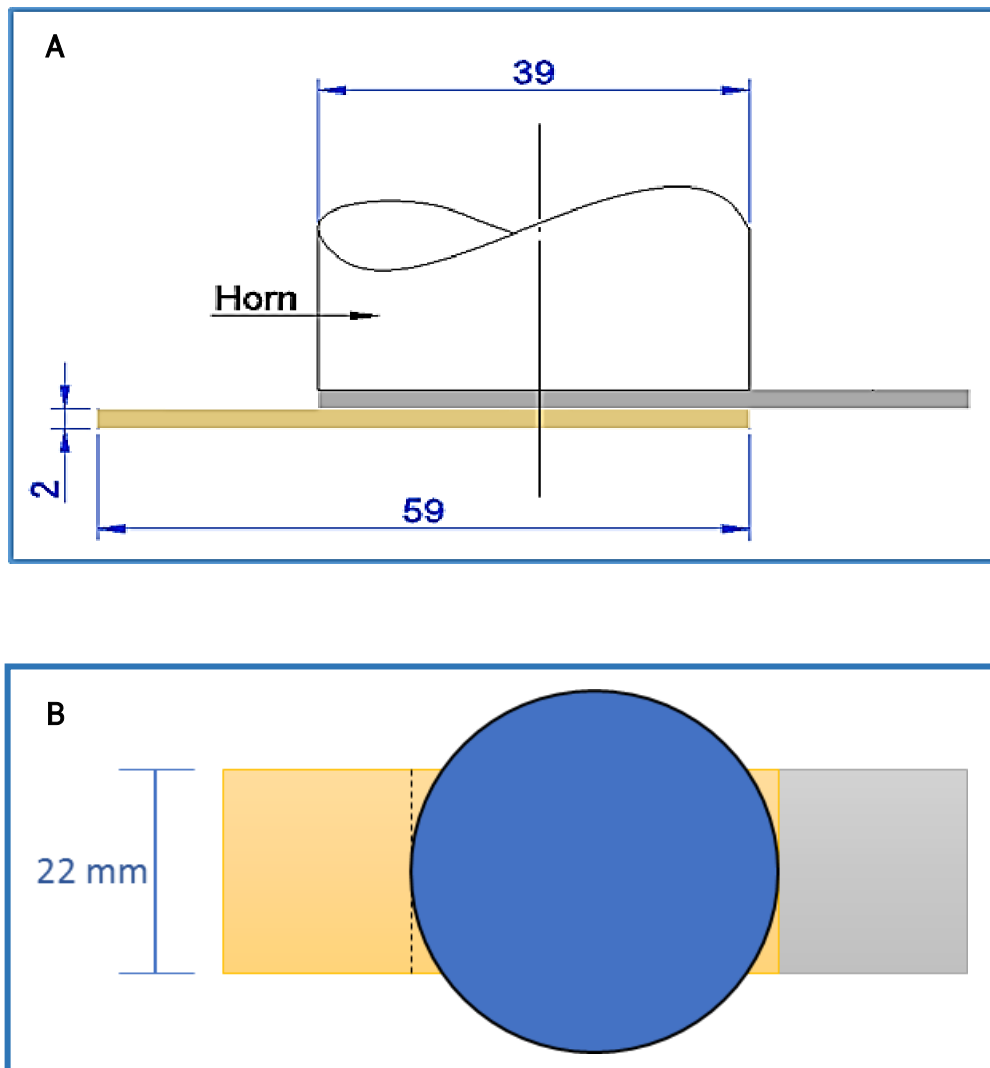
Lap joint of dissimilar materials A) side view, B) top view.
